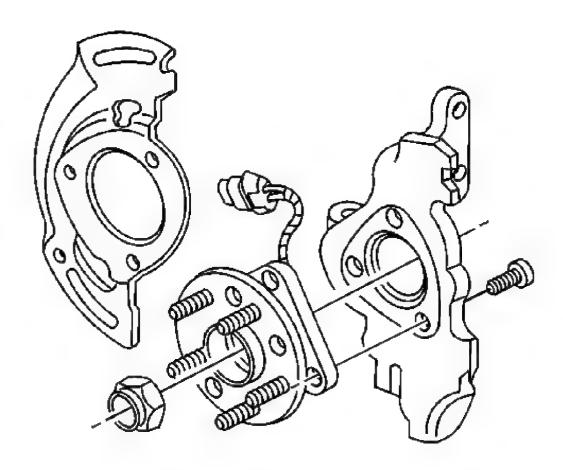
Removing/Installing Wheel Bearing/Hub Retaining Bolts Courtesy of GENERAL MOTORS CORP.
